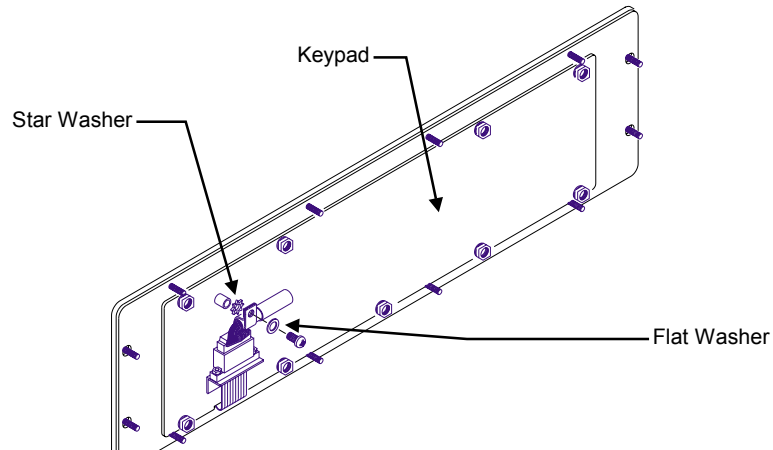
PanelMate 4000 & 5000 Keypad Unit Keyboard
